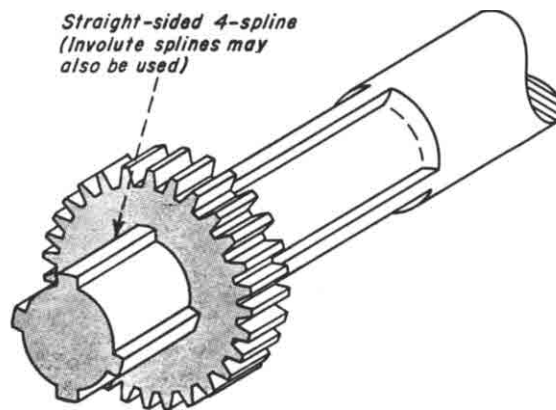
Splined shafts are frequently used when a gear must slide. Square splines can be ground to close minor diameter gaps, but involute splines are self-centering and stronger. Non-sliding gears can be pinned to the shaft if it is provided with a hub.
